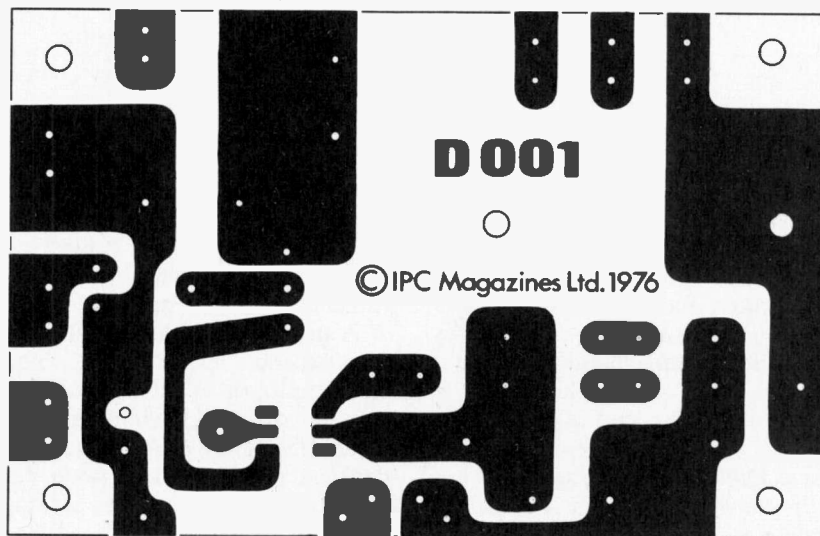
Printed board pattern and component layout for the audio takeoff unit, both drawn full size. Note that some of the components have been slightly repositioned compared with the prototype board shown in the photographs. Fibreglass laminate should be used for the board to ensure good insulation.
